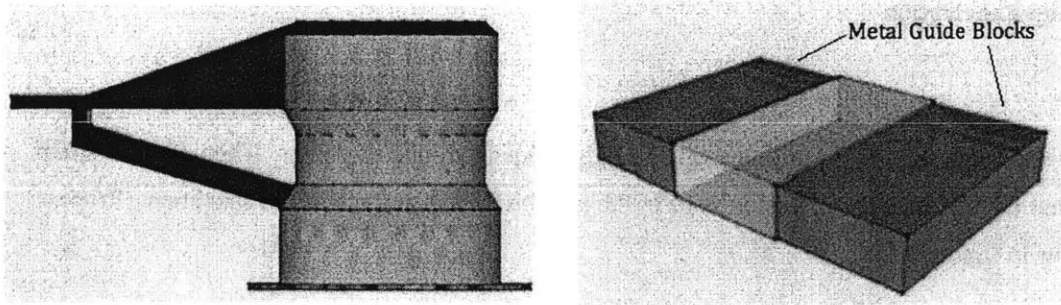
Machine (Orbital) Sander and Guide Blocks
